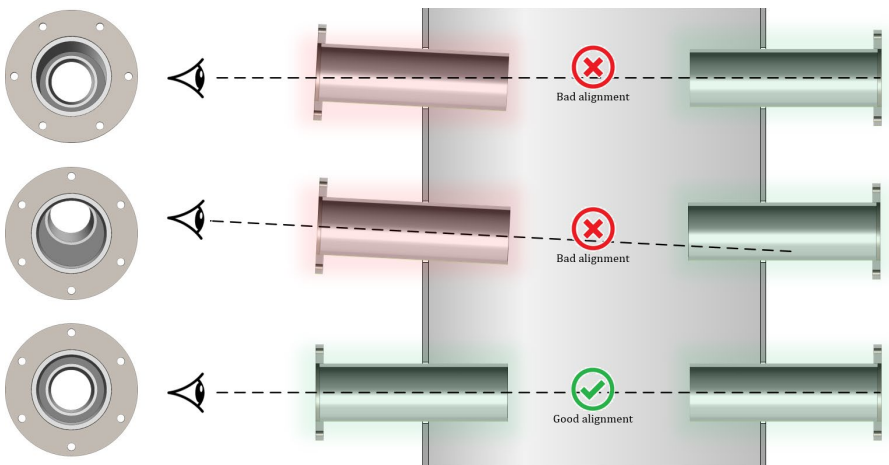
, Opposite welding bracket alignment by eye
